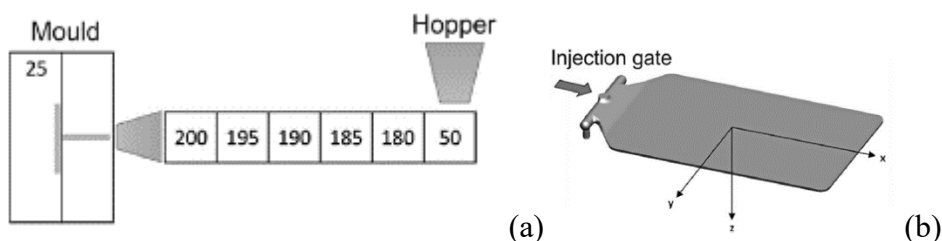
(a) Injection-moulding temperature profile, (b) injection-moulded specimen.
